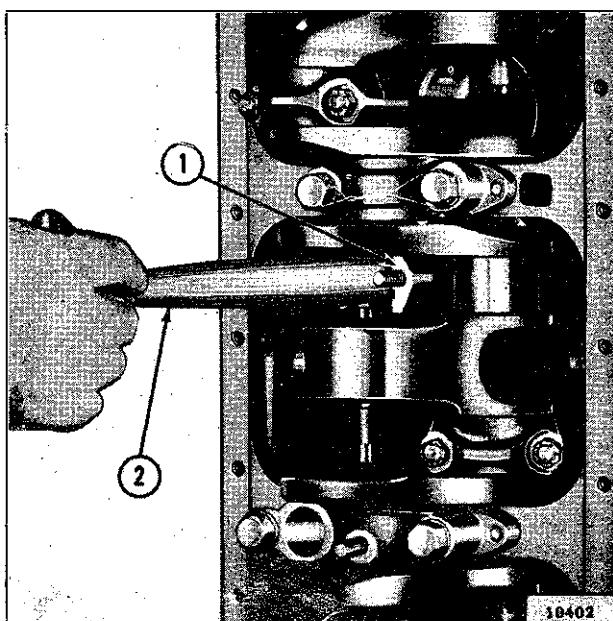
REMOVING PISTON AND CONNECTING ROD ASSEMBLY
